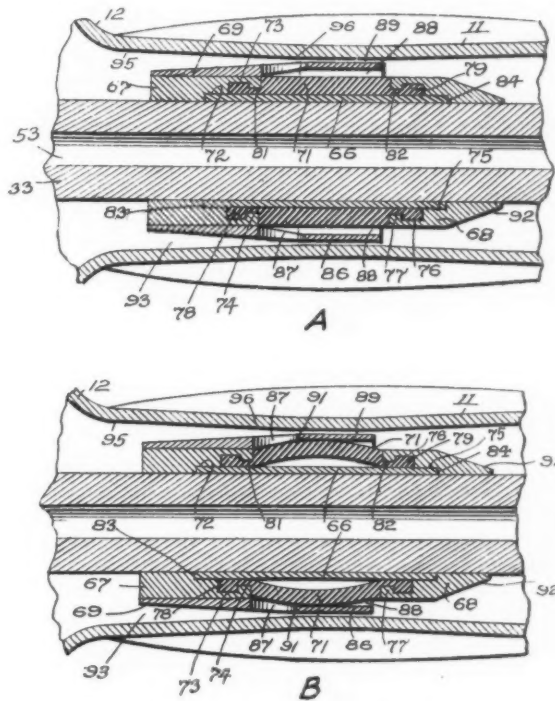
Details of the rubber and protector sleeves of governor, the parts being expanded at B
